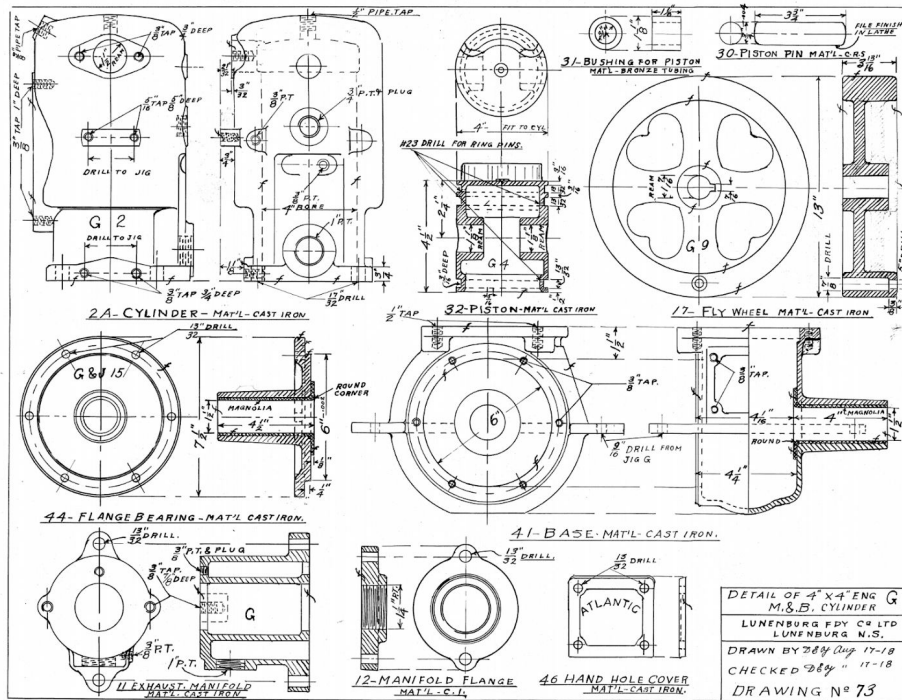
An example of the hand drawn engineering drawings created for the Atlantic engine [3].
